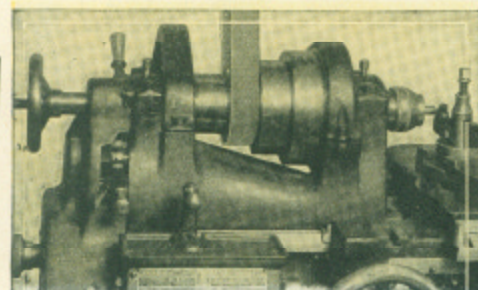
Hand Wheel Draw-in Collet Chuck Attachment on a Tool Making Job
